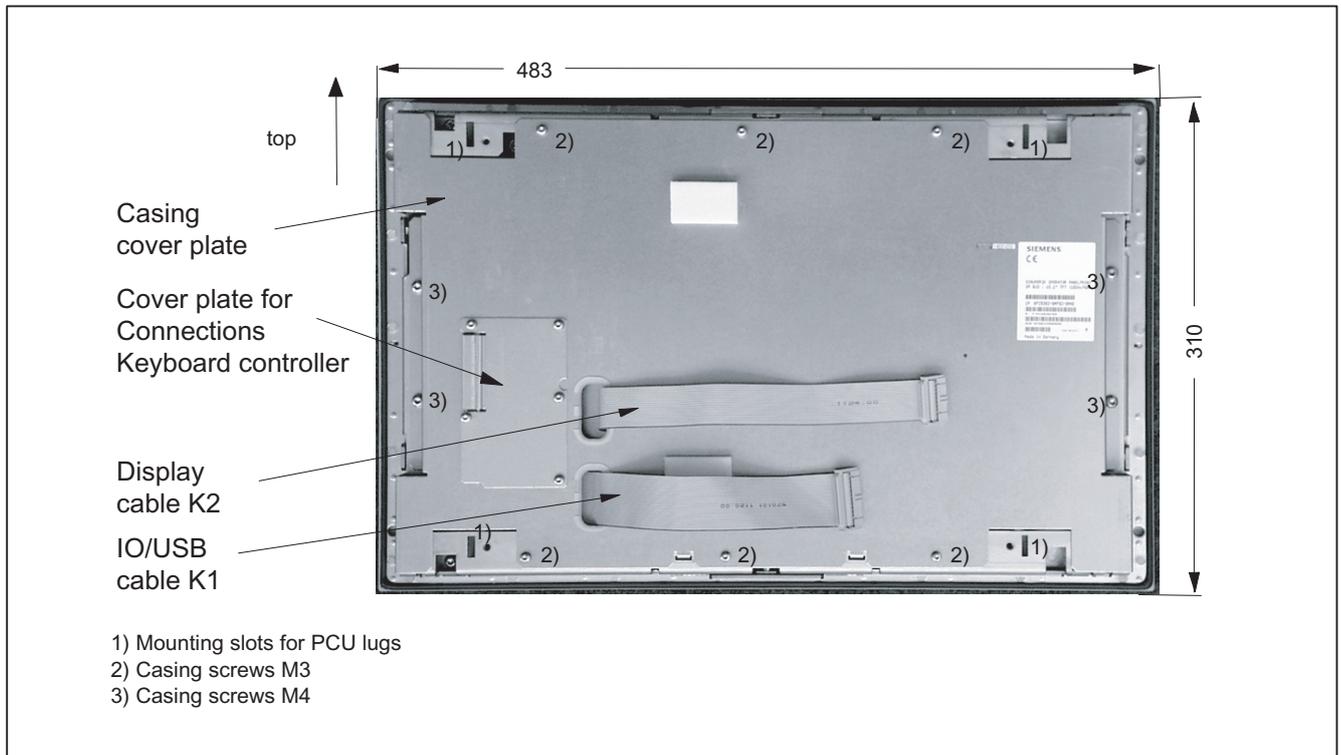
Rear side of operator panel front with position of interfaces and mounting slots
